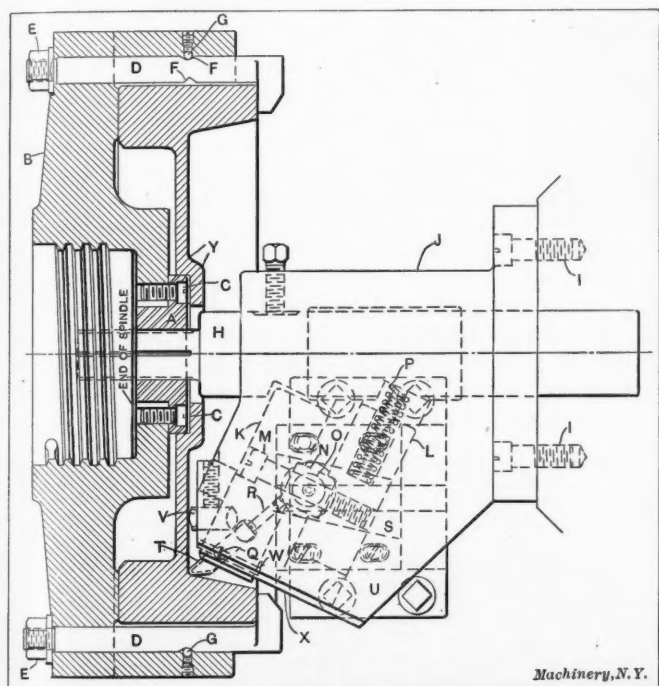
Details of Chuck and Taper Boring-tool used in the Second Operation
